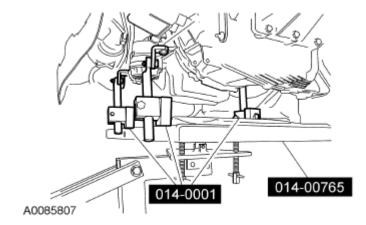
Identifying Powertrain Lift And Universal Adapter Brackets Courtesy of FORD MOTOR CO.
